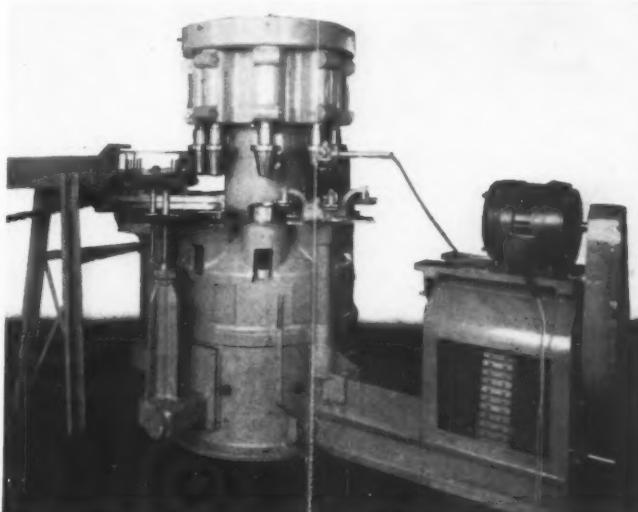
Continuous automatic machine for forming flower pots which produces 6000 an hour through multiple production
